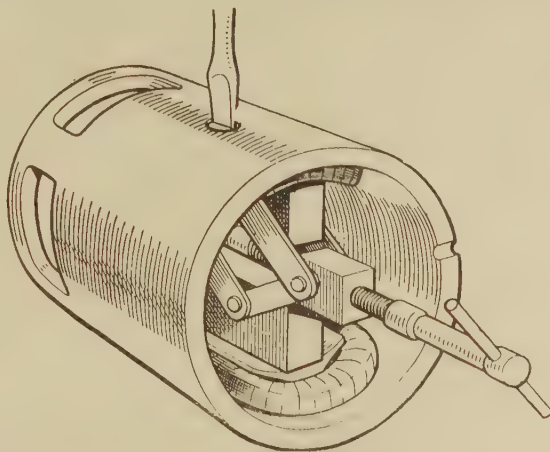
The Expander Tool used for Fitting the Pole Pieces Correctly.
